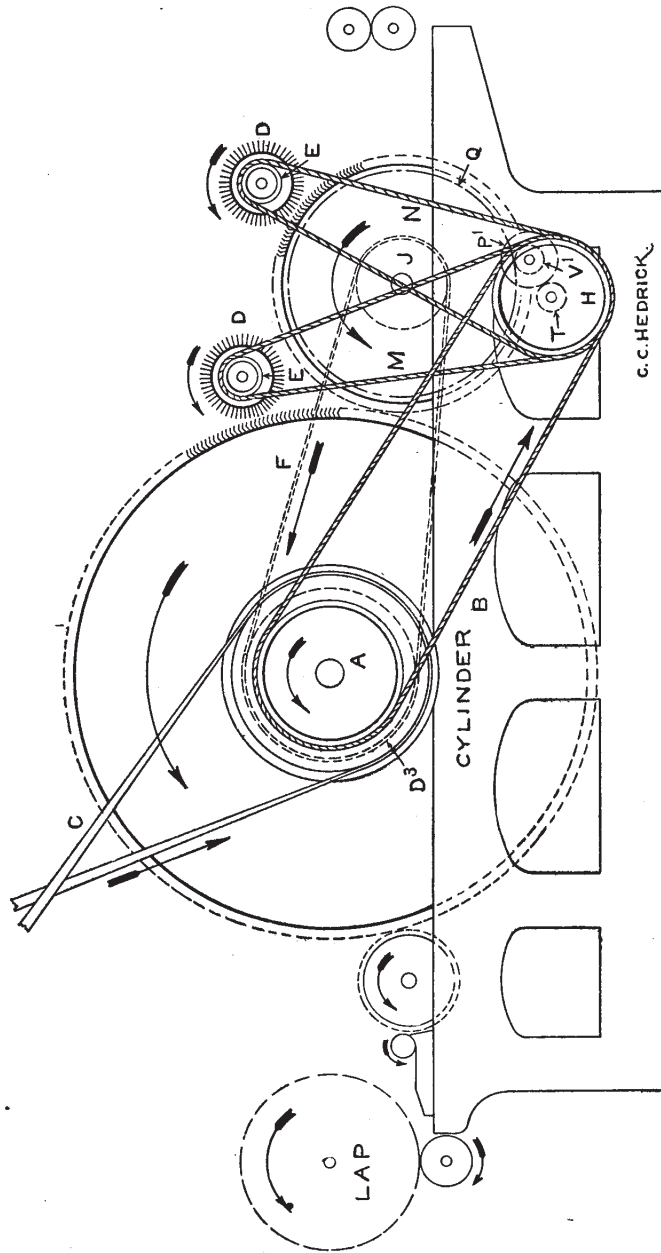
Elevation of Card Showing Belting used in Burnishing.
